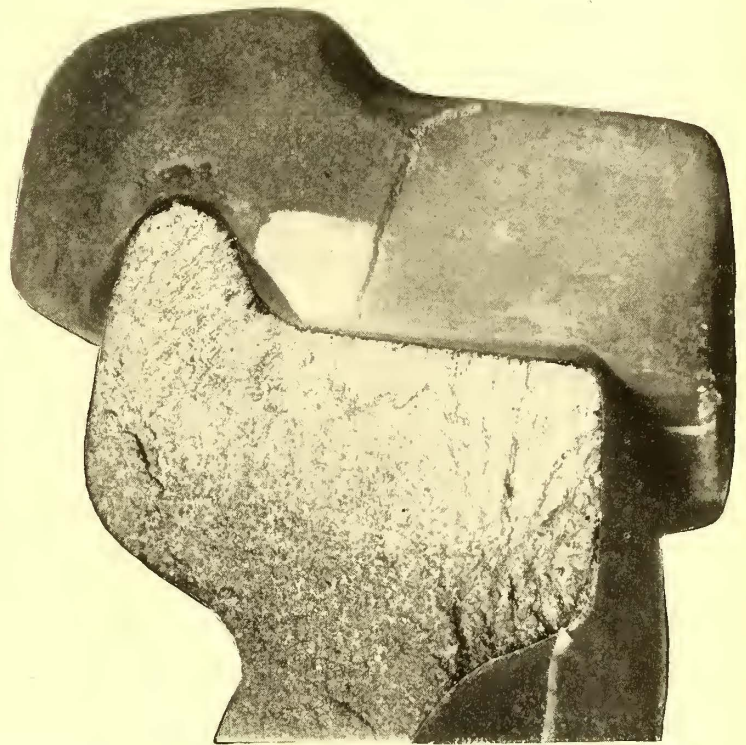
WHEEL WITH DEEP CHILL ENTIRELY ACROSS TREAD
